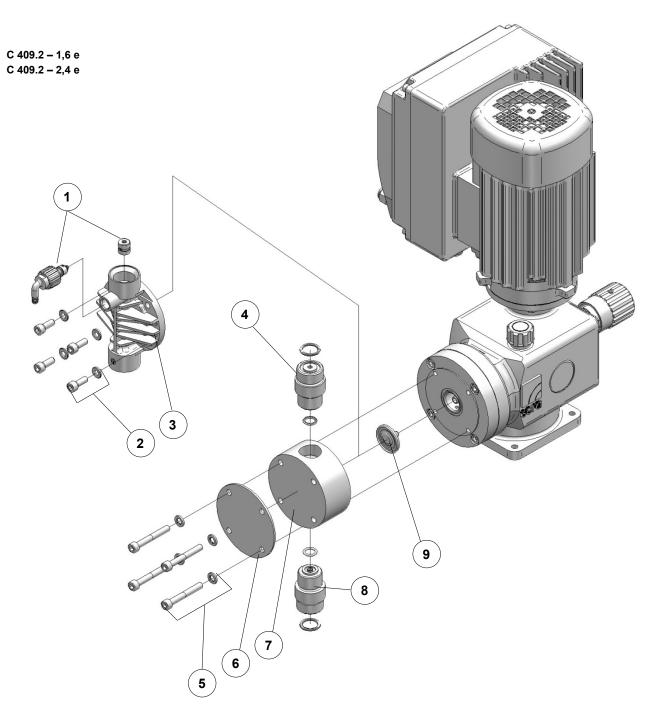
Spare- and wearing parts (C 409.2- 1,6 e ...-2,4 e)
